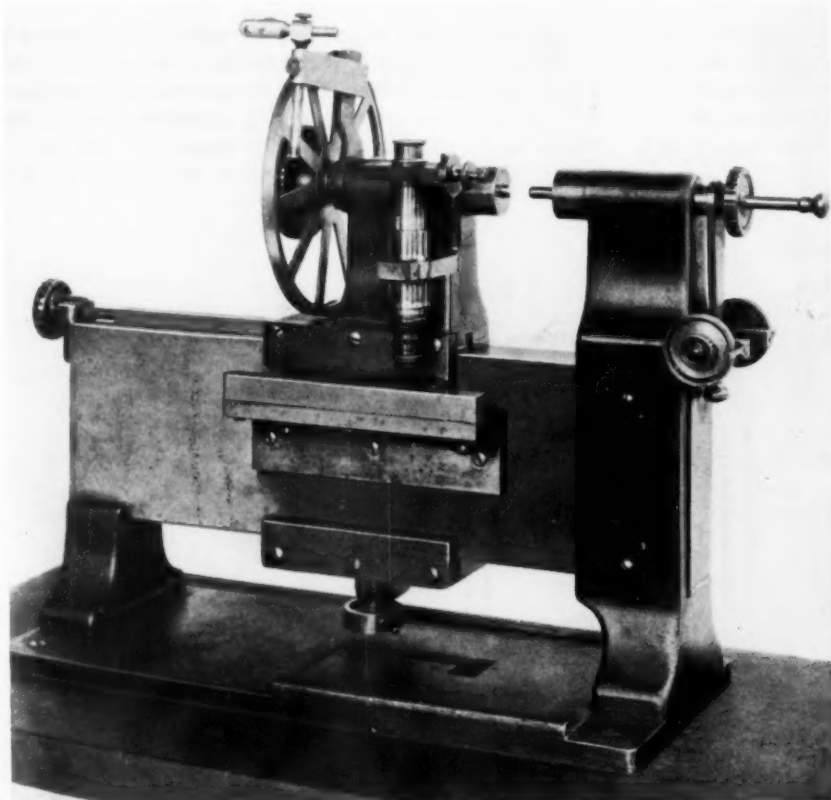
EARLIEST PRECISION MACHINE FOR LINEAR MEASUREMENTS
